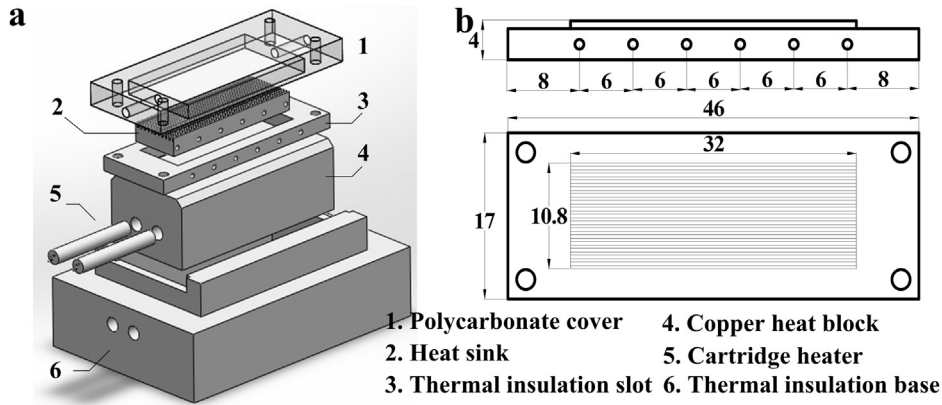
Schematic of test module and micro-channel heat sink (a) exploded view of test module (b) dimensions of micro-channel heat sink (Unit: mm).
